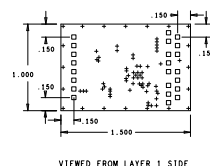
SMP-BQ24133-MVK Fabrication Drawing
